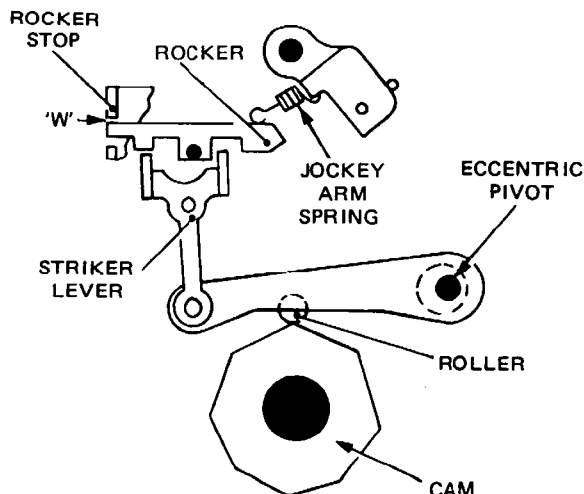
TRANSMITTER STRIKER AND CONTACT BLOCK ASSEMBLY
